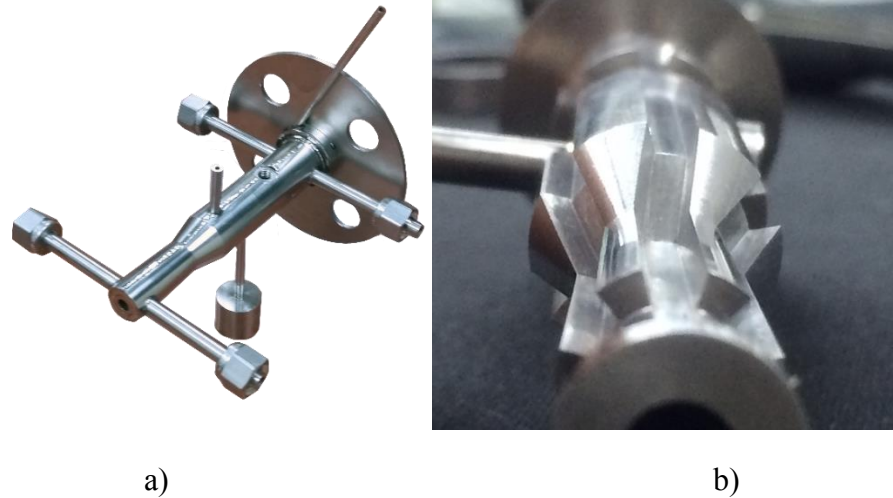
a) Isometric view of the 60 kW combustor b) Milled cooling channels
